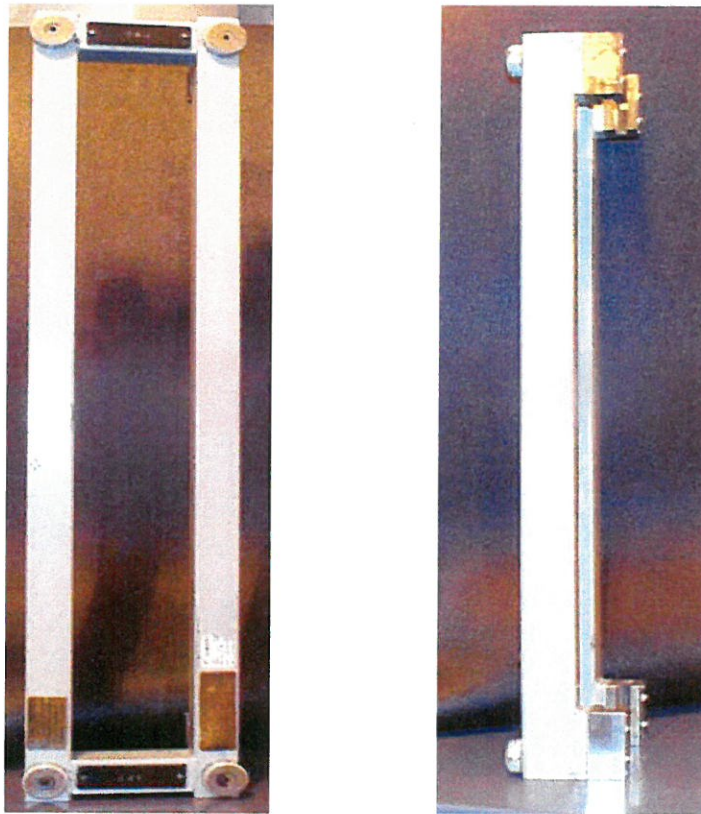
Beam, Indicator Deflection Assembly (Dwg. 1806042)
